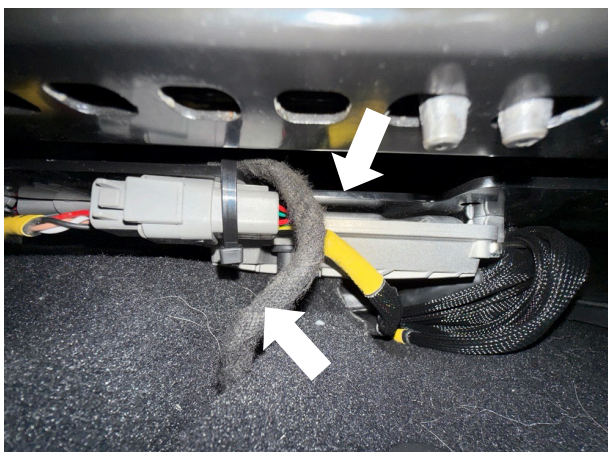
OE harness (bottom arrow) routing through the notch (upper arrow) on the driver's side of the ECU/IMU bracket under the driver seat
